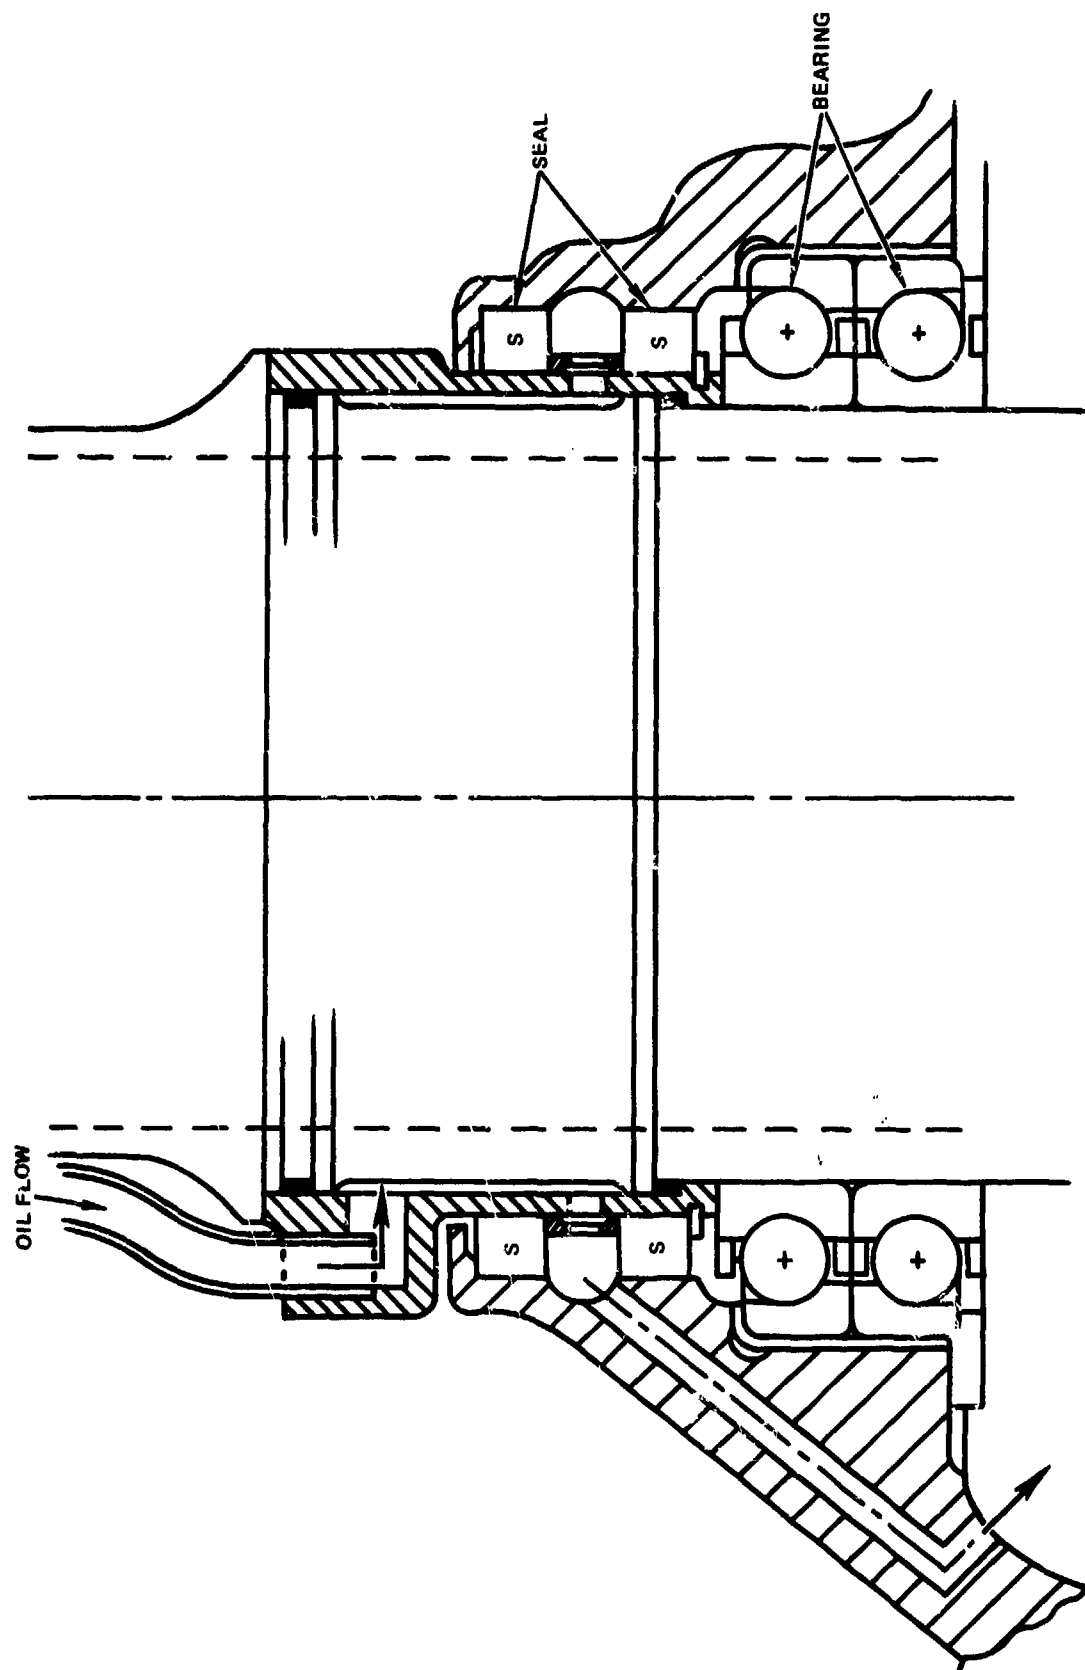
Rotor Anti-Icing/Transmission Lube Oil Cooling-Return Oil Seal.
